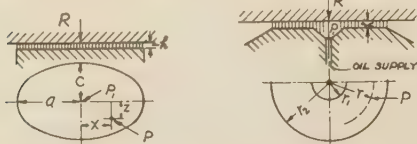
, APPROACHING FACES WITH OIL FILM BETWEEN THEM
